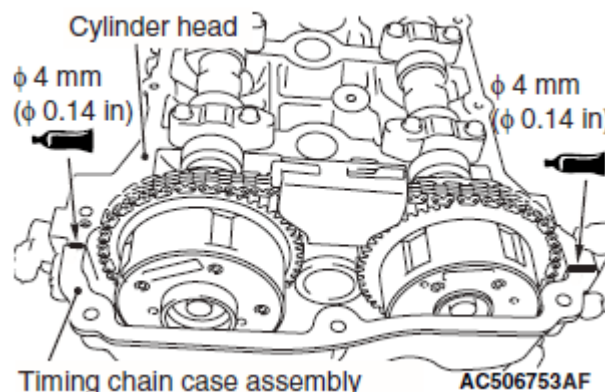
Identifying Timing Chain Case Assembly And Cylinder Head To Sealant Applying Area
